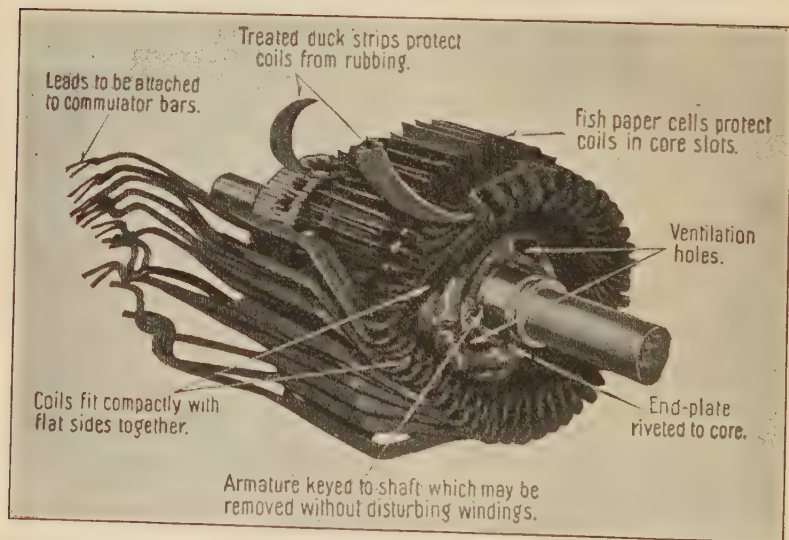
Partly wound armature showing method of assembling coils (Westinghouse).
